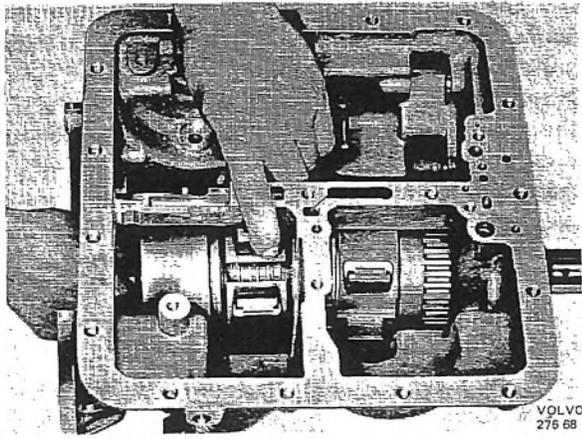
Withdrawing rear clutch and forward sun gear group
